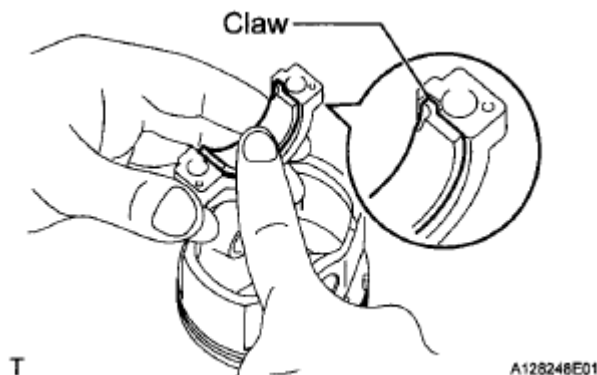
Aligning Bearing Claw With Groove On Connecting Rod Or Connecting Cap
